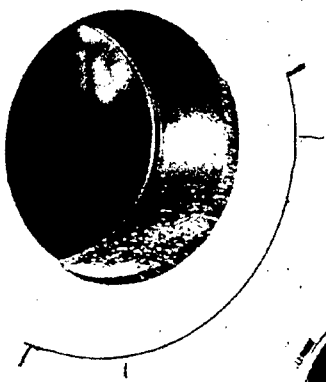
Port upper wing-attachment hole showing the cut in the starboard and lower side of the hole
